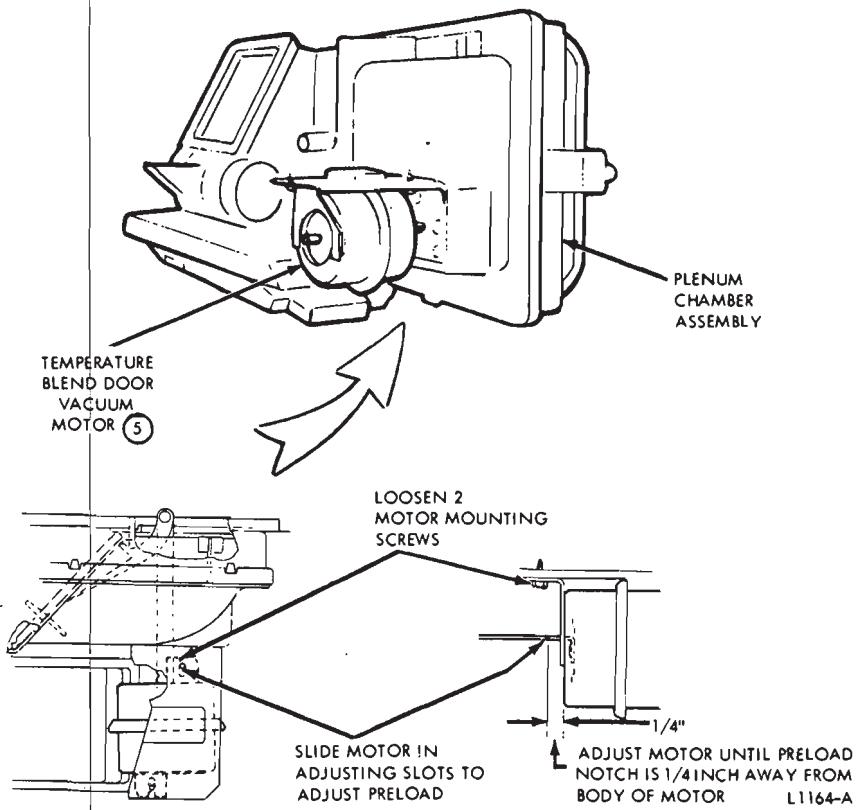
Temperature Blend Door Vacuum Motor Adjustment—Lincoln Continental
